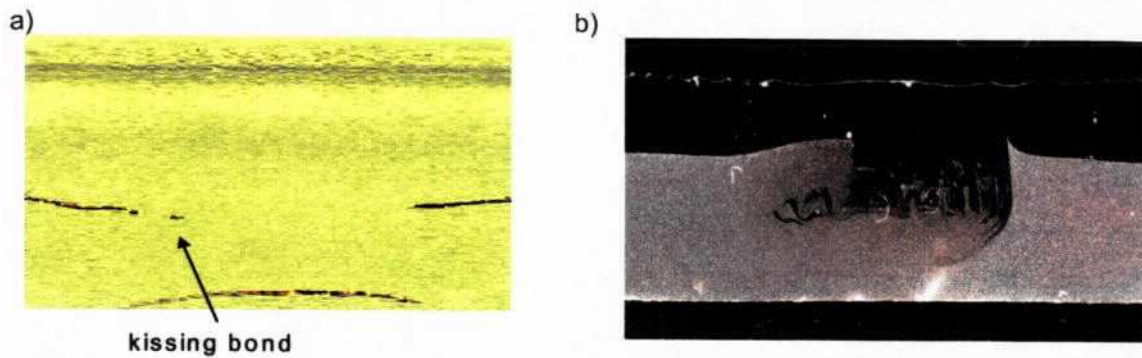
Cross-section of a third lap joint with a kissing bond. Welding parameters: threaded cylindrical pin, welding speed of 500 mm/min, spindle speed of 1000 RPM, shoulder penetration of 0.2 mm. a) SAFT image obtained by laser-ultrasonics on the far side of the tool and b) corresponding metallography.
